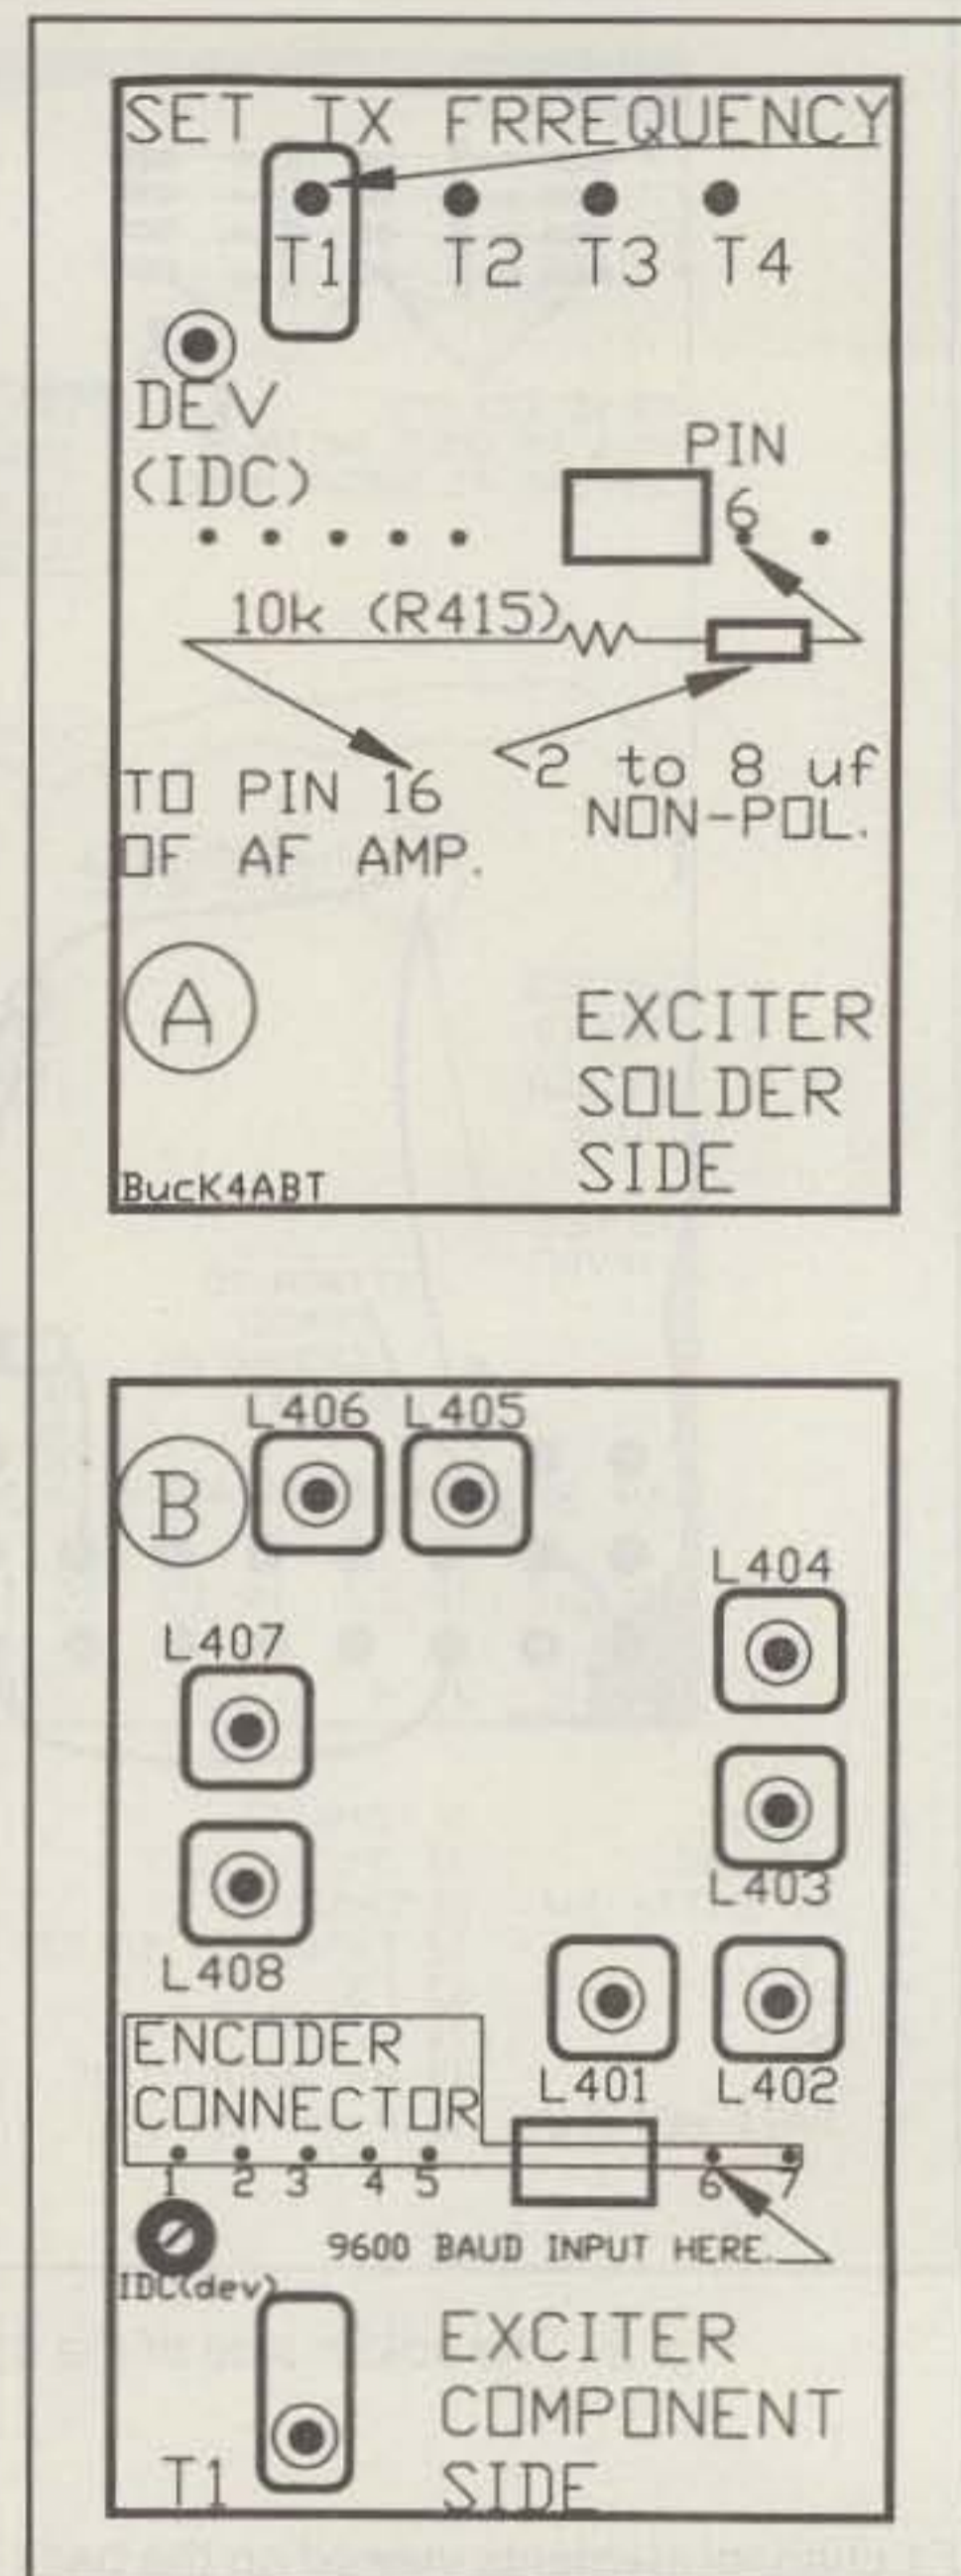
(A) Solder side of the exciter. (B) Component side of the exciter.
